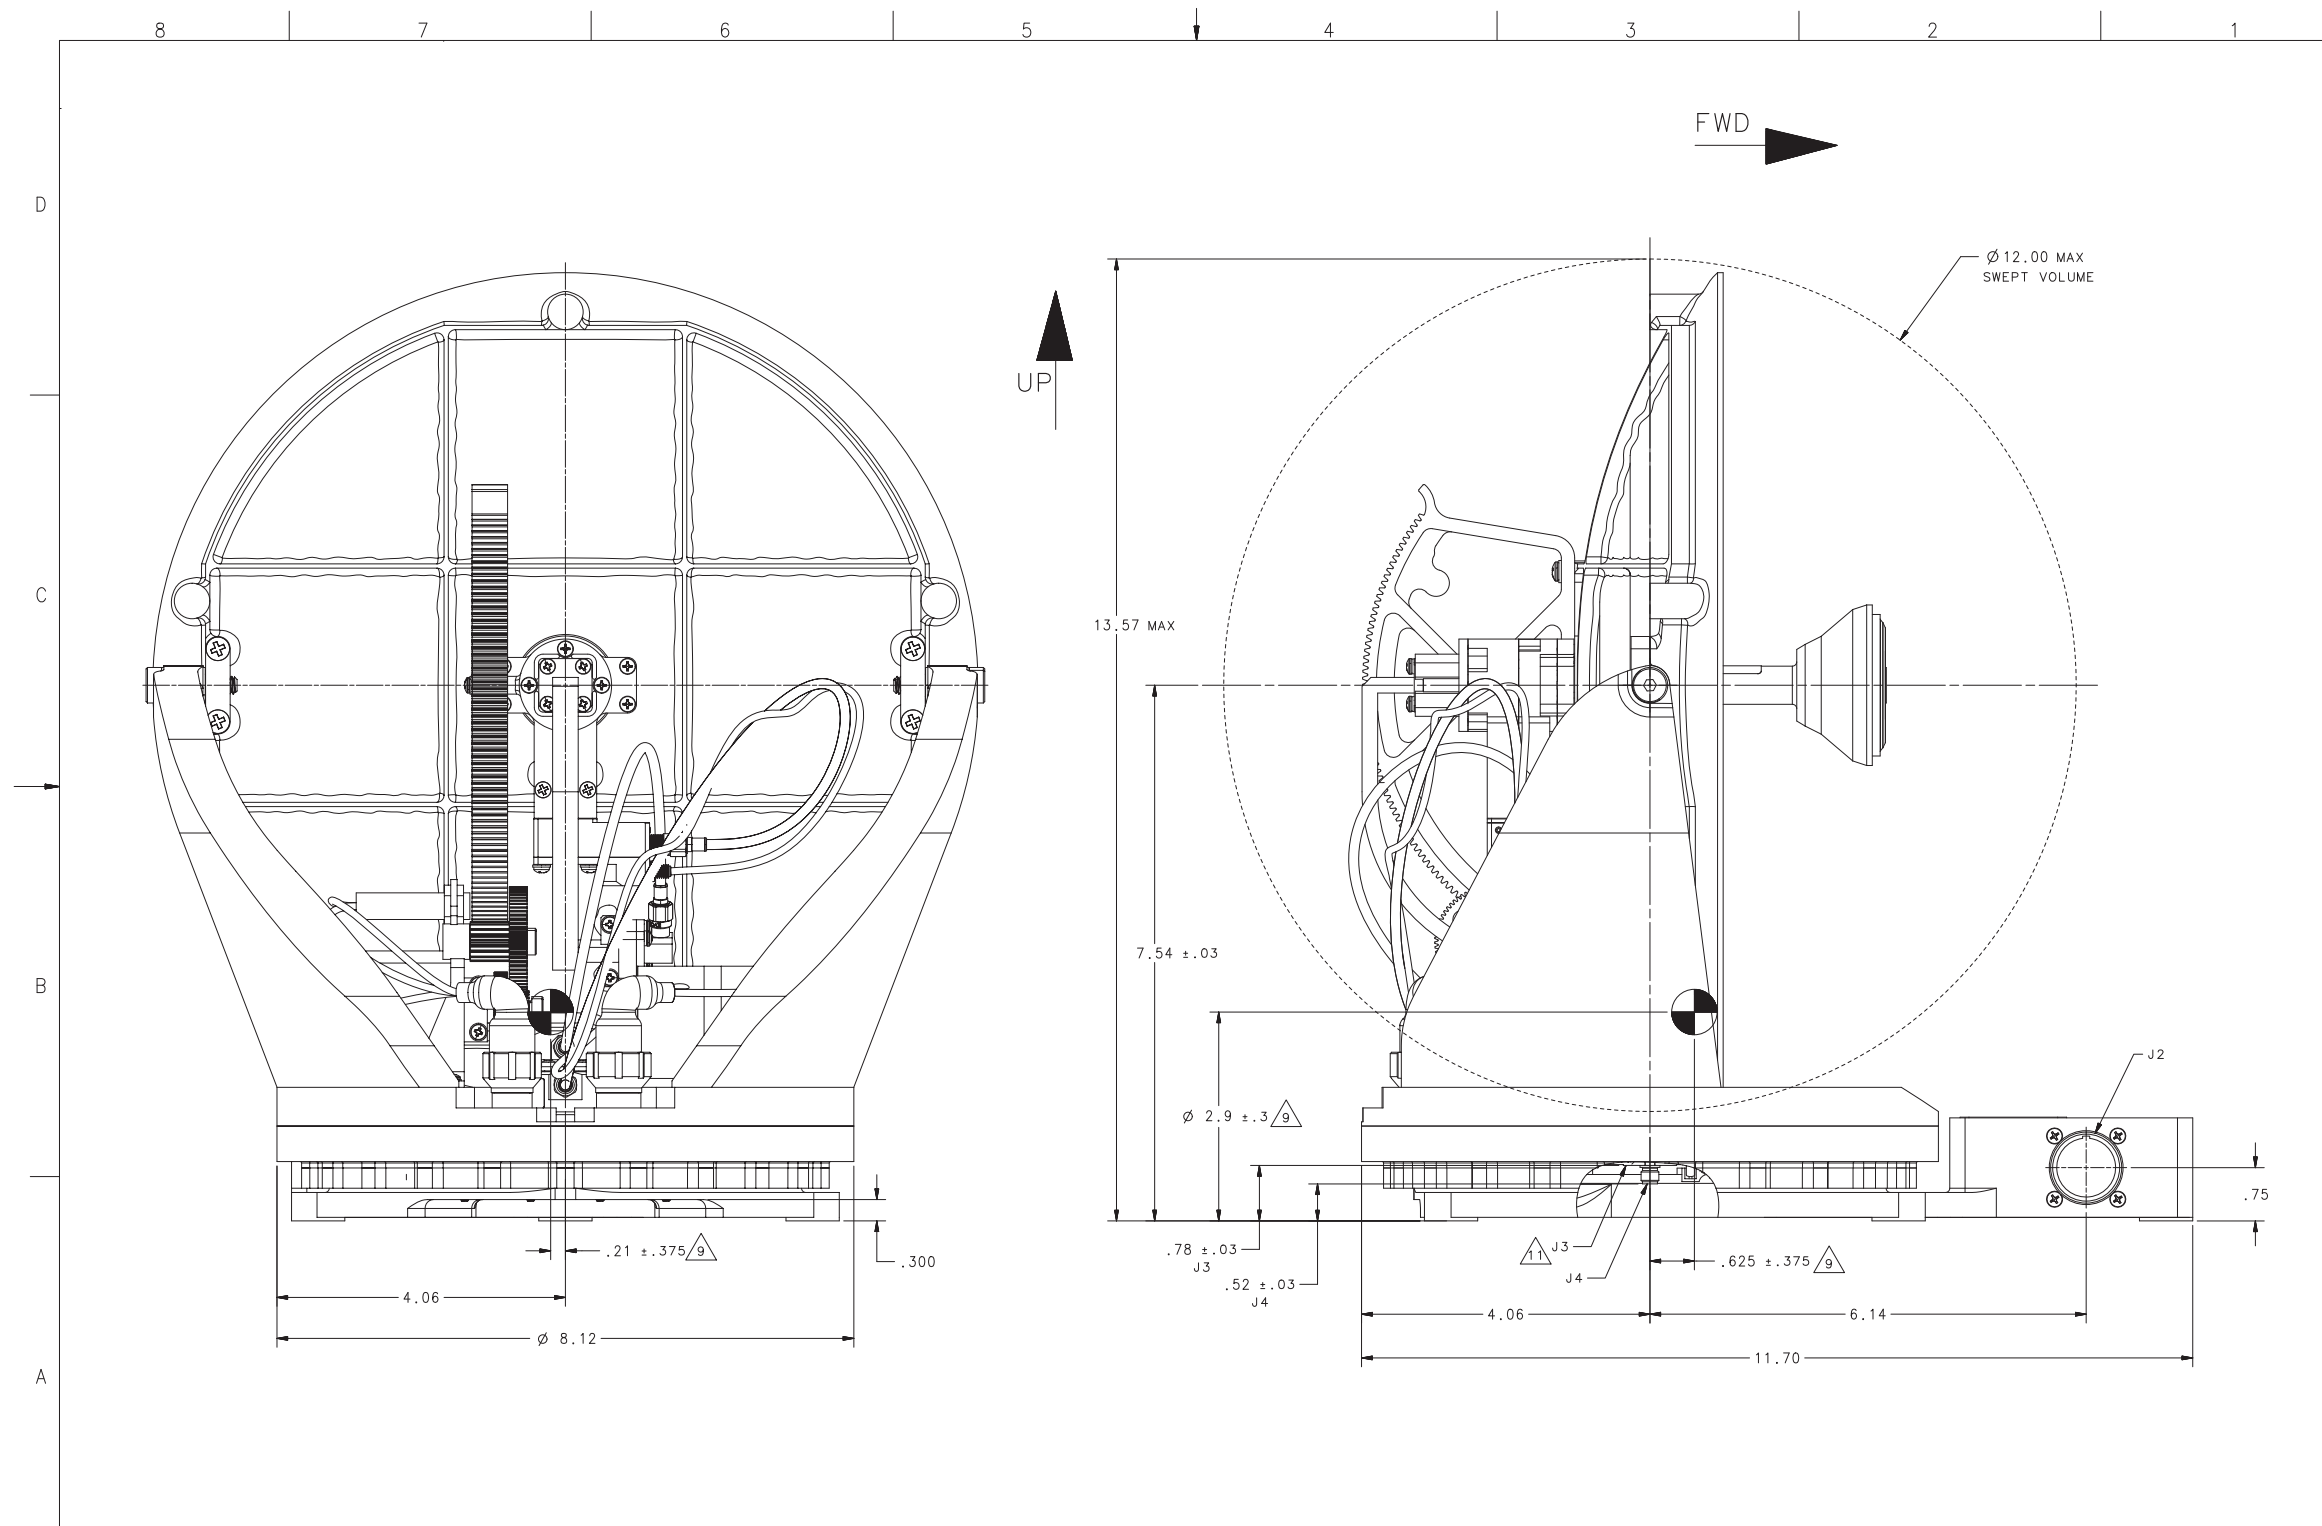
TMA Outline and Installation Drawing (Sheet 3 of 4)
